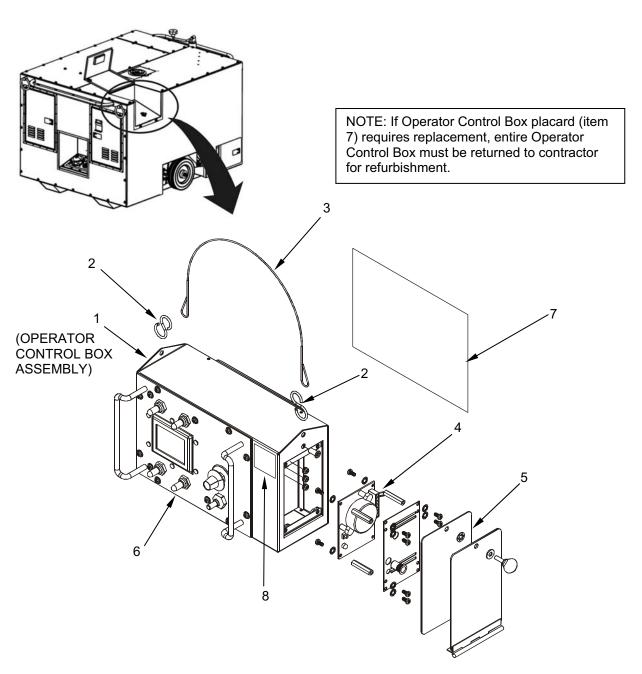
Assembly, Operator Control Box (Sheet 1 of 2).
